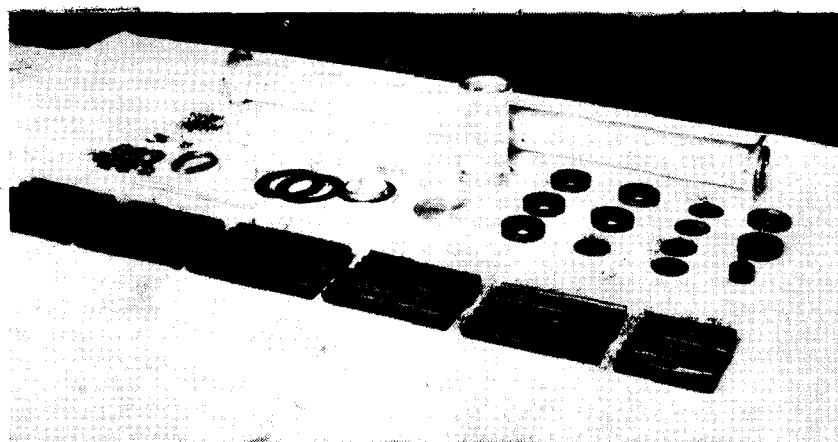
The photograph of each part of the PCP chamber before the first assembly.
